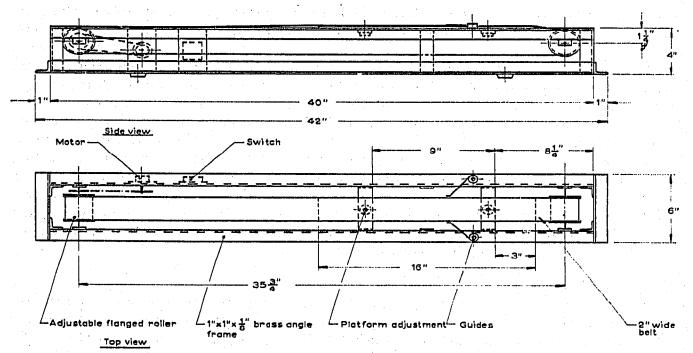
Scanner assembly. Top view and side view showing dimensions in inches.
